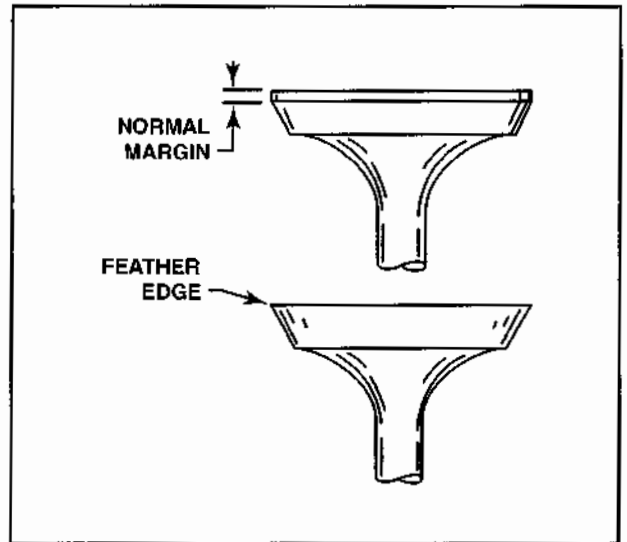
A valve should still have an acceptable margin after grinding. A feather edge is caused by grinding a valve too much.
